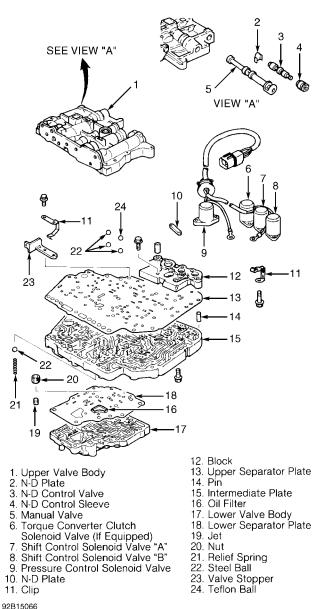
Identifying Valve Bodies & Intermediate Plate Courtesy of Mitsubishi Motor Sales of America.
